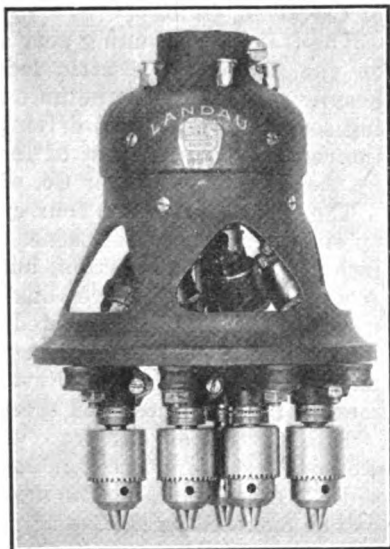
LANDAU MULTIPLE-SPINDLE HEAD
